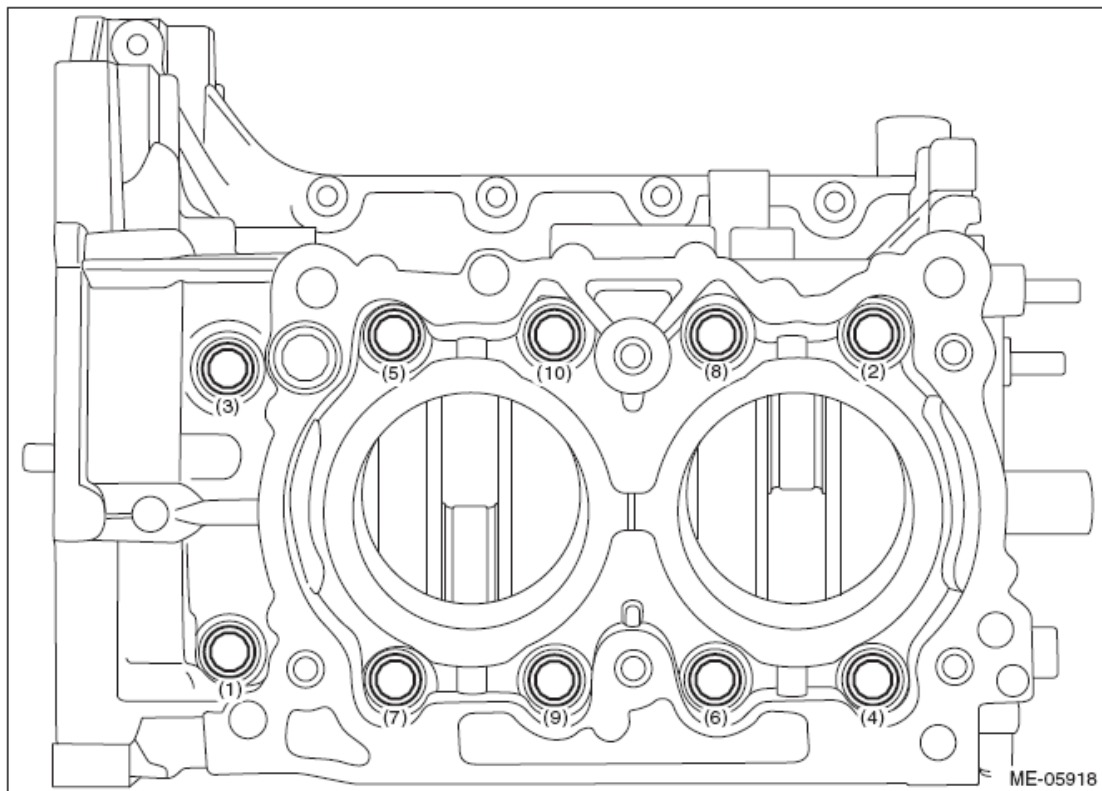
Identifying Cylinder Block Mounting Bolts Loosening Sequence
